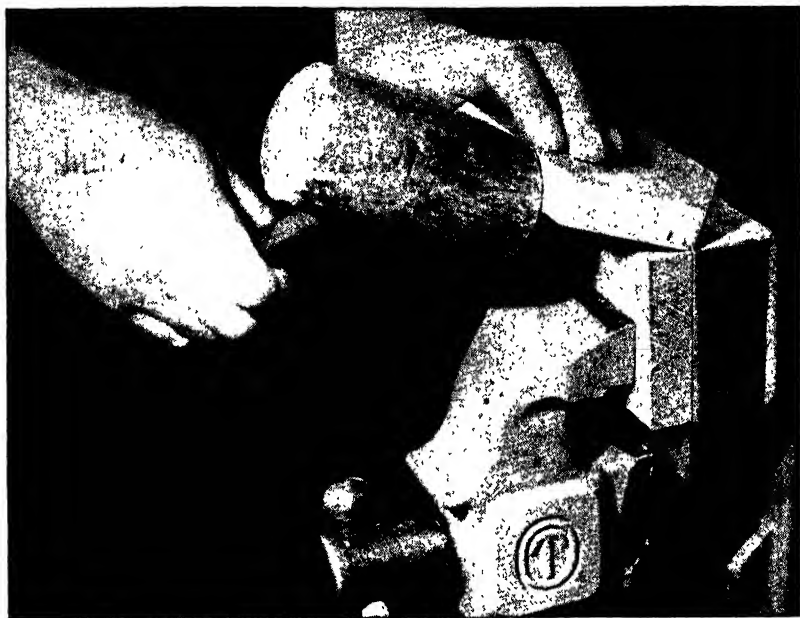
Bending the corner between blocks of wood held in the vise.
